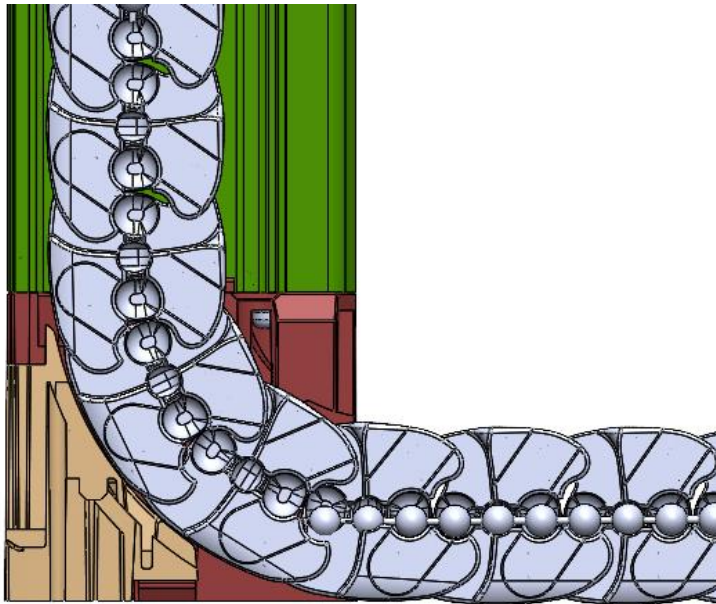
Lower handlebar head and interface with the lower chain.
